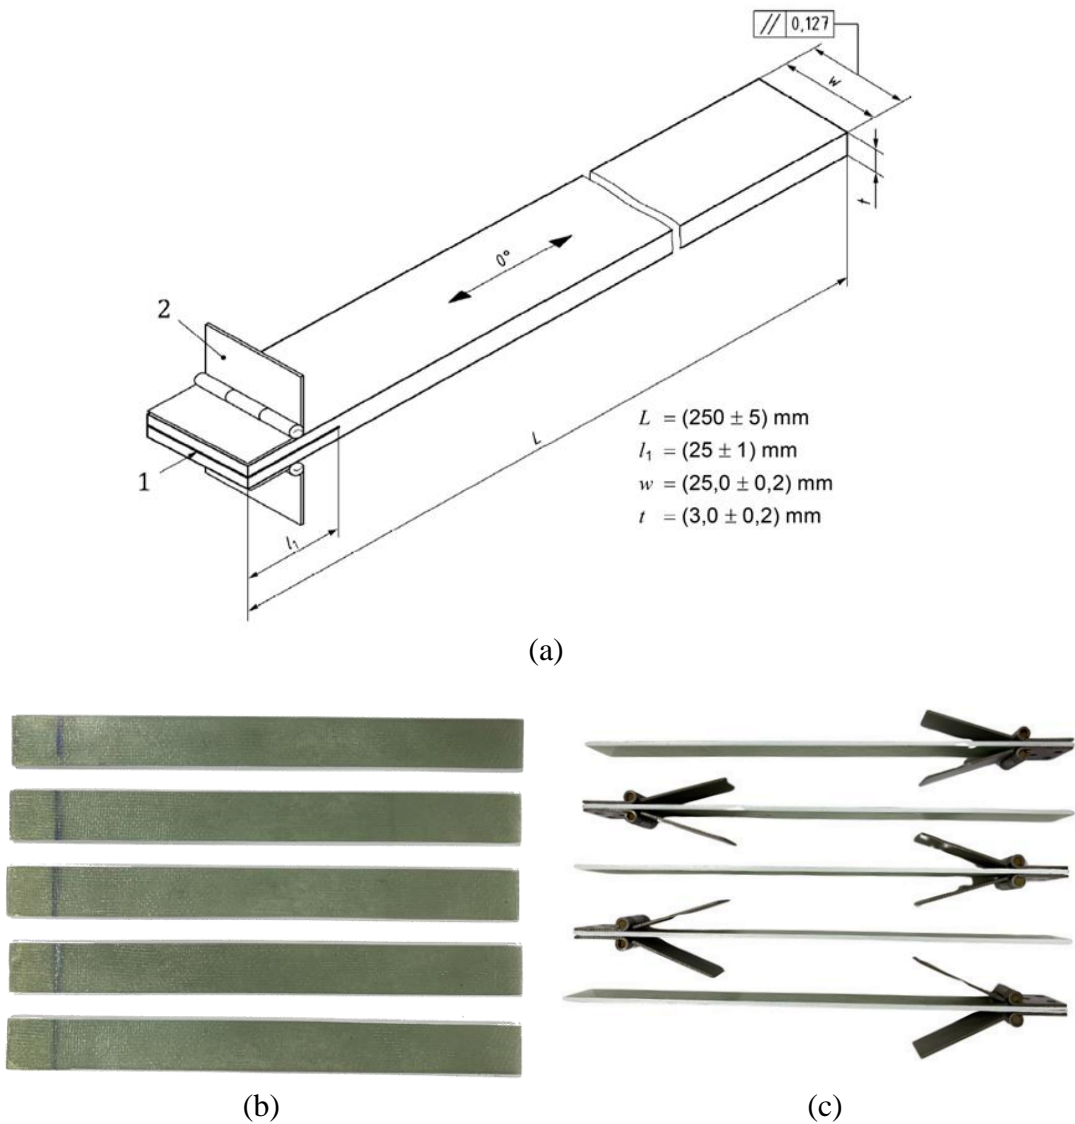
(a) Dimension of DCB specimens given in DIN EN 6033 standard, (b) DCB specimens after the water jet cutting process, (c) DCB specimens with hinges attached and white paint is applied.
